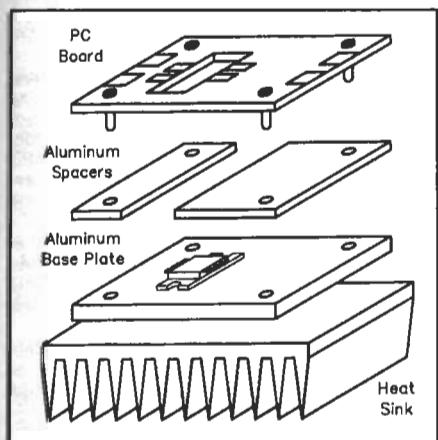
Mechanical assembly of the amplifier-module PC board, aluminum spacers and heat sink.
